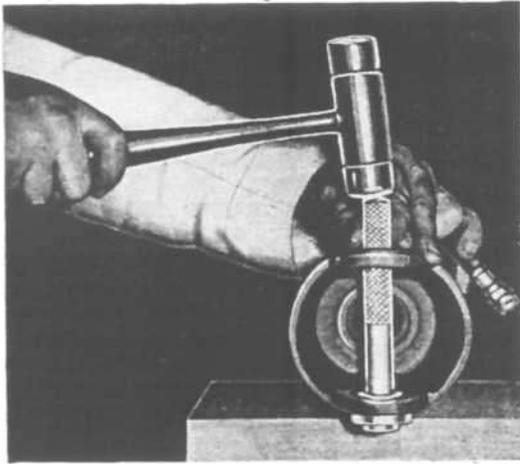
SPINDLE PIN BEARING CUP DRIVER
